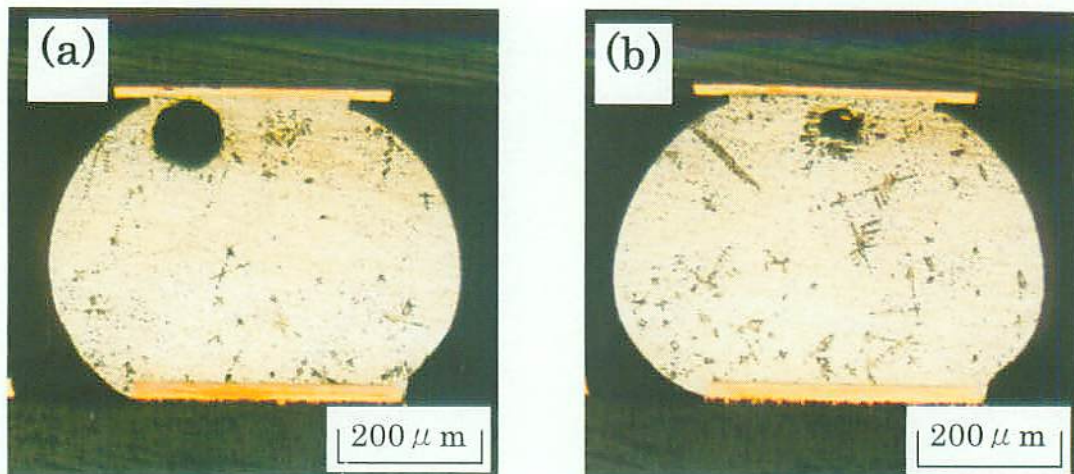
Section cut of solder ball including inner void at no other parts.
